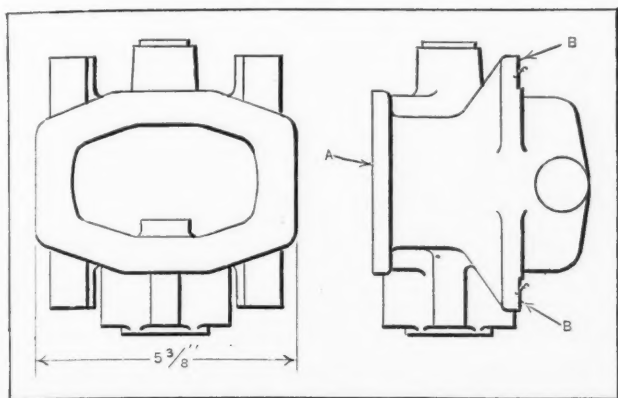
Electrical Refrigerator Crankcase Milled with Equipment Shown in Fig. 3
